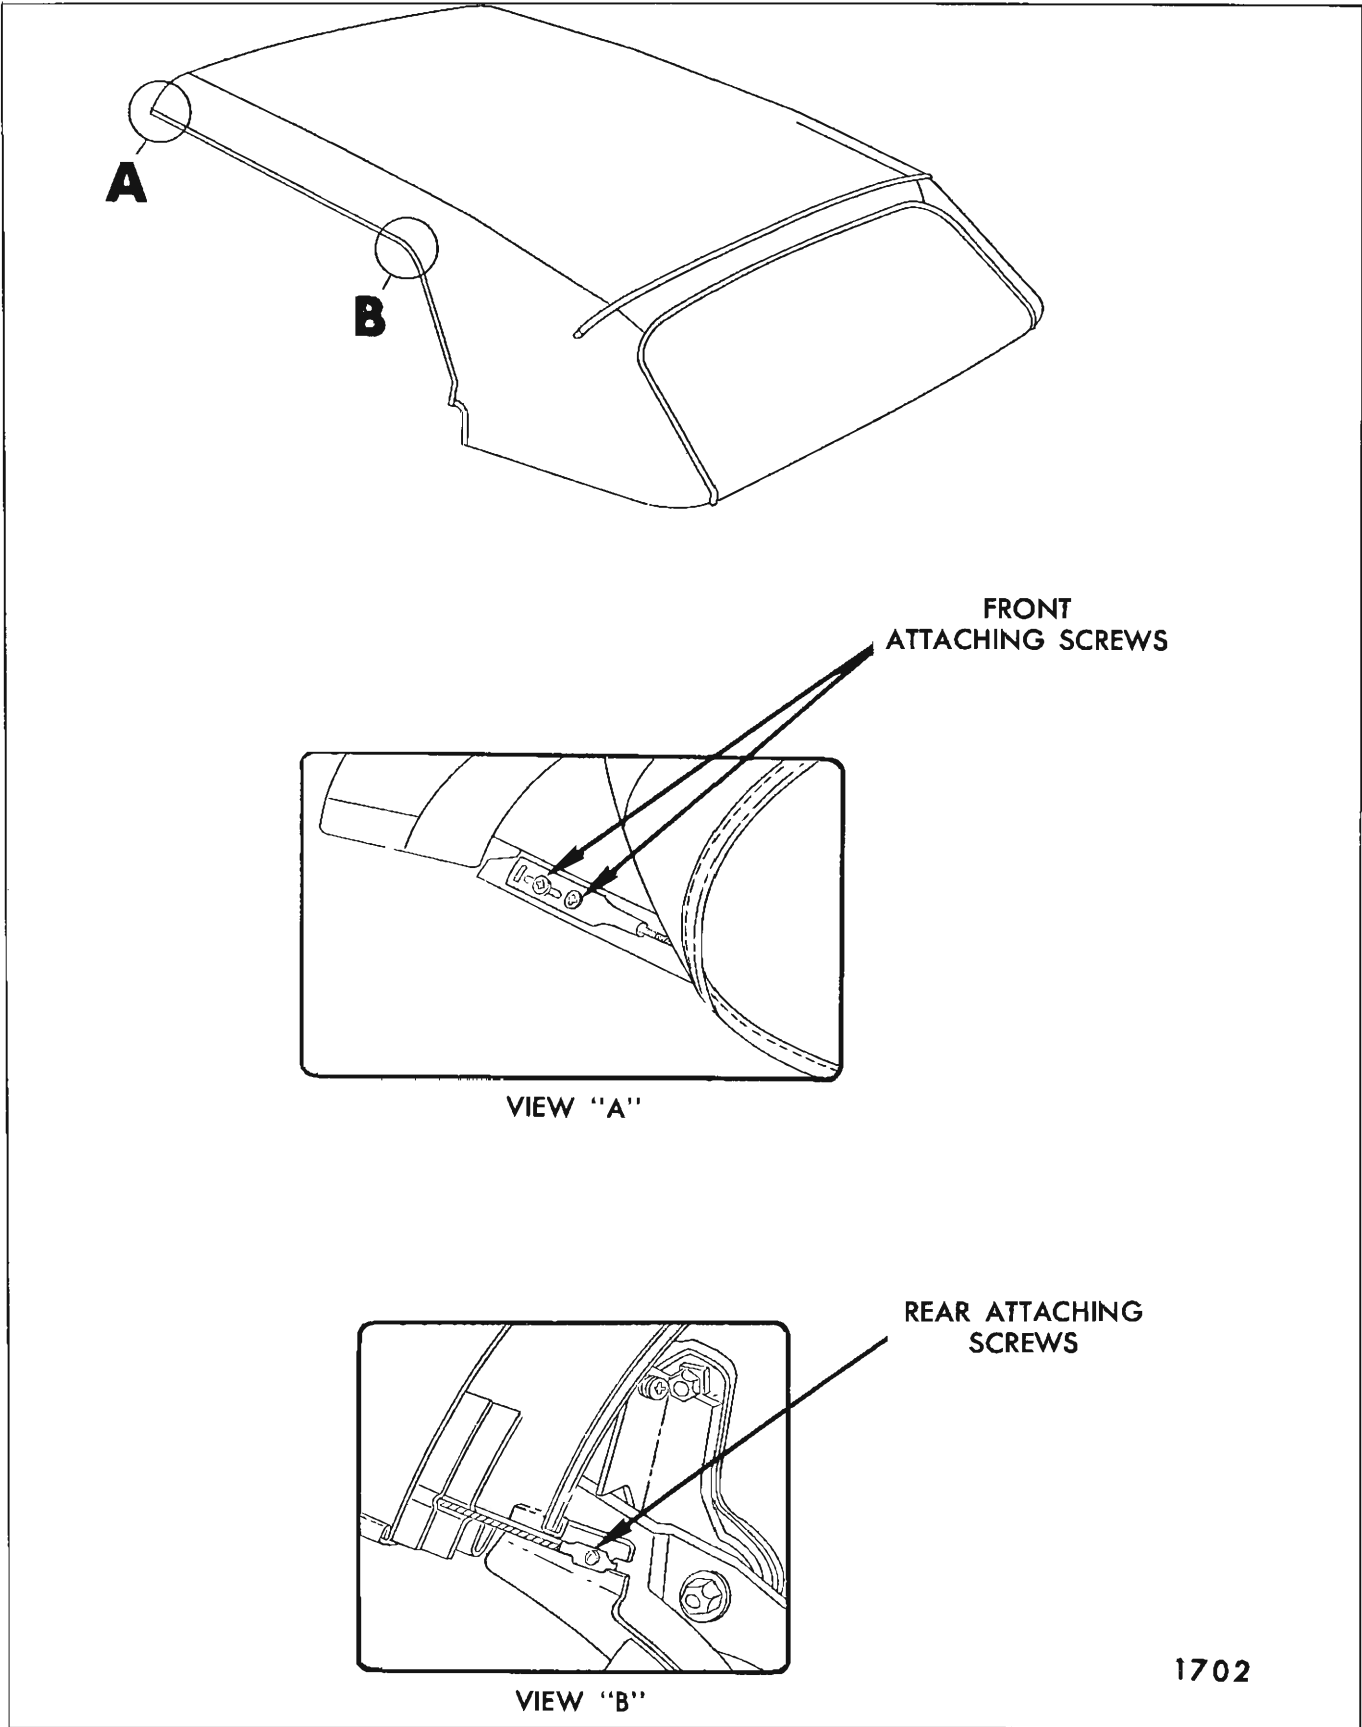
Hold-Down Cable Attaching Screws
